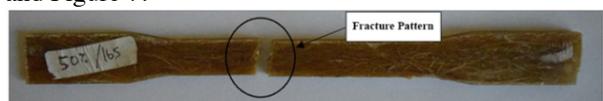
Macrostructure of tensile test specimen fracture with a fiber length of 165 mm using of 20% volume fraction
